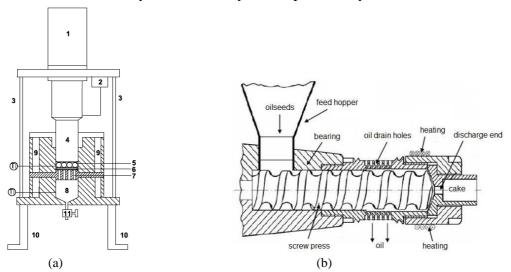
Equipments for oil expression: a. Hydraulic press, [13]; b. Screw press, [5] 1 – hydraulic unit; 2 – displacement sensor; 3 – support; 4 – plunger; 5 – seeds; 6 – filter medium; 7 – sieve plate; 8 – collection chamber; 9 – jacket; 10 – frame; 11 – needle valve; TI – thermocouple
